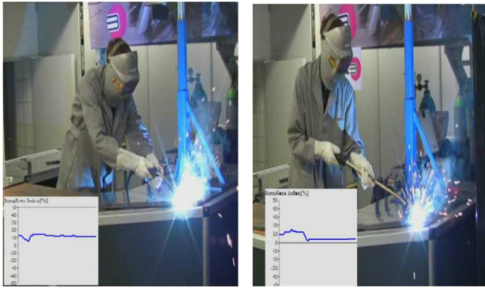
The welder in the same welding position but with two different torches (one standard and one with long neck) [16]
